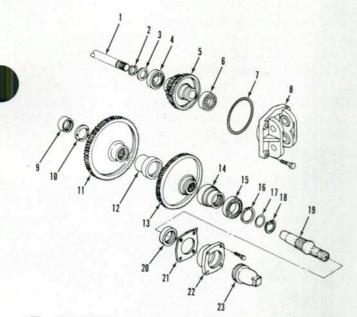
Exploded view showing pto reduction gears. clutch output shaft and pto output shaft. On 1000 rpm models only, drive gear (5) is a single gear and spacer (12) is used in place of 540 rpm driven gear (11).
